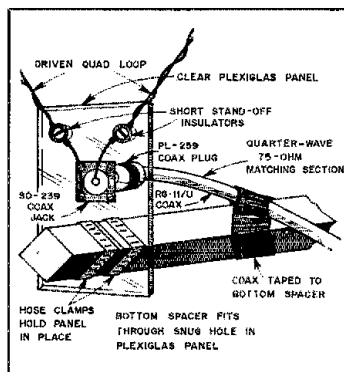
The coaxial-cable feed-point fixture is made of clear Plexiglas and slips onto the bottom spacer.
